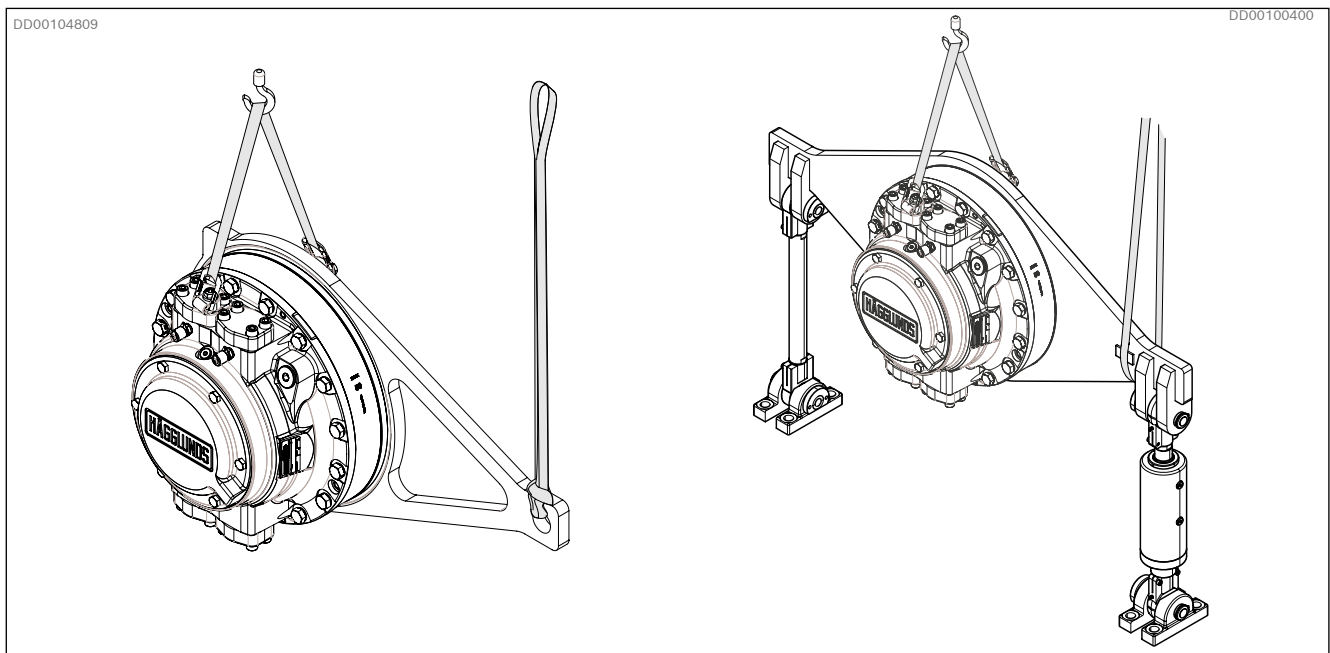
Example, lifting of motor mounted to single/double ended torque arm
